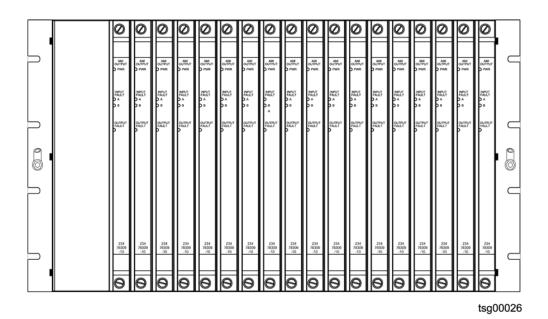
TSG-3800EX 19-Inch Expansion Shelf, Front View
